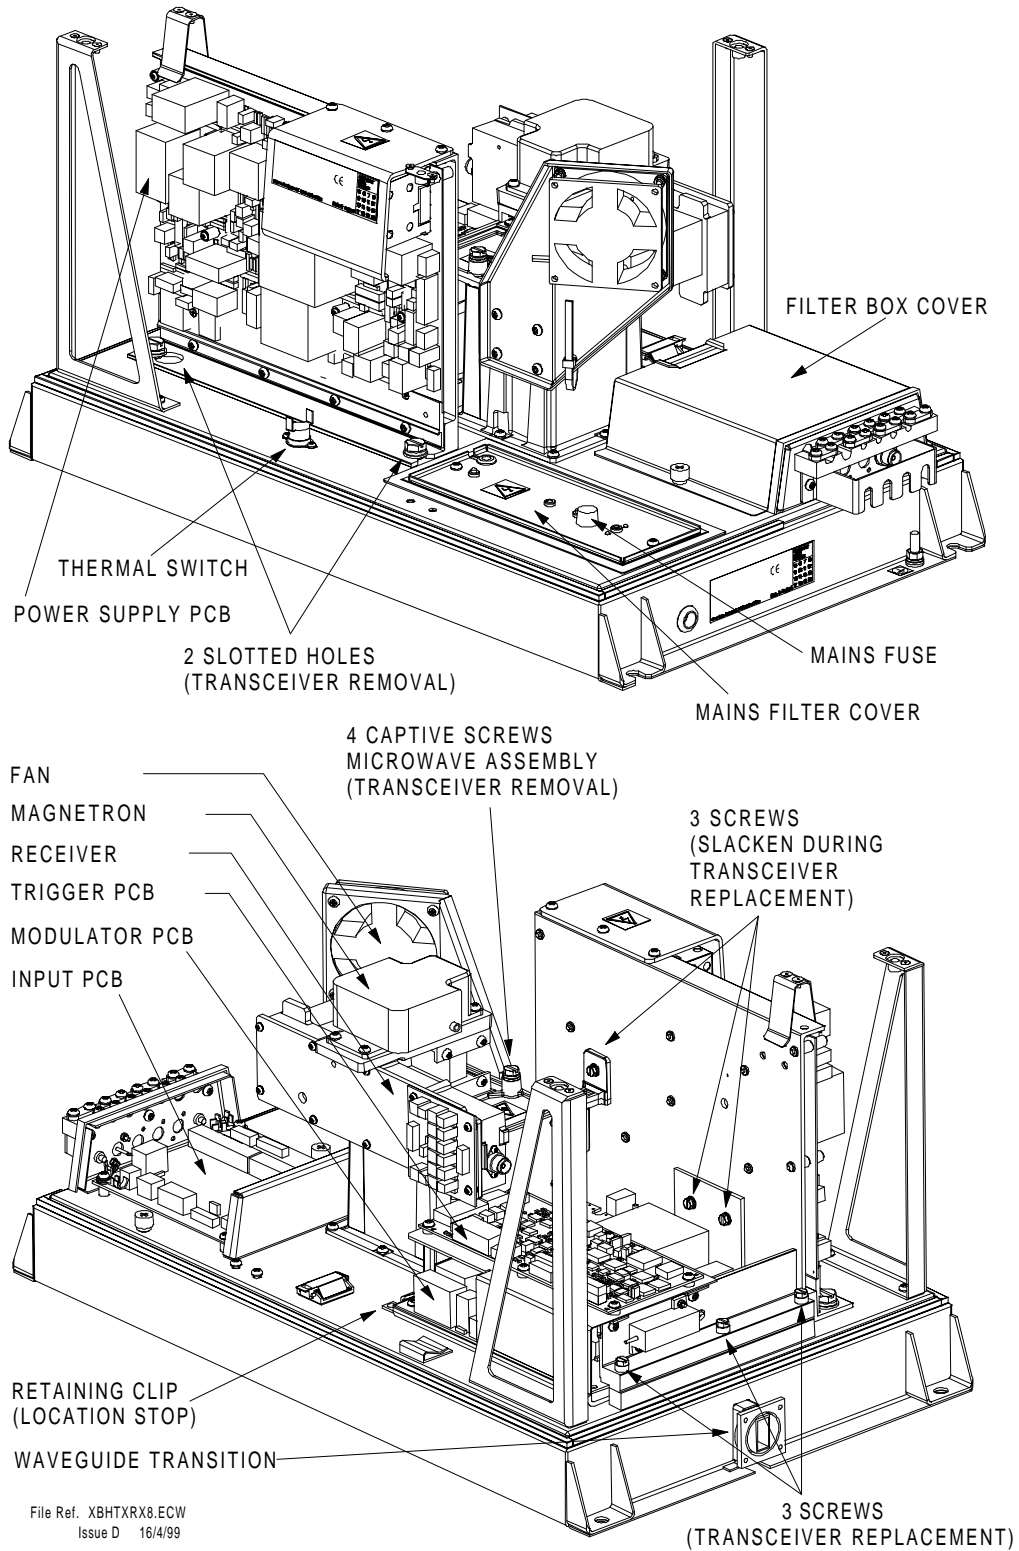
X-Band Bulkhead Turning Unit - View showing assemblies fitted to lower casting.
